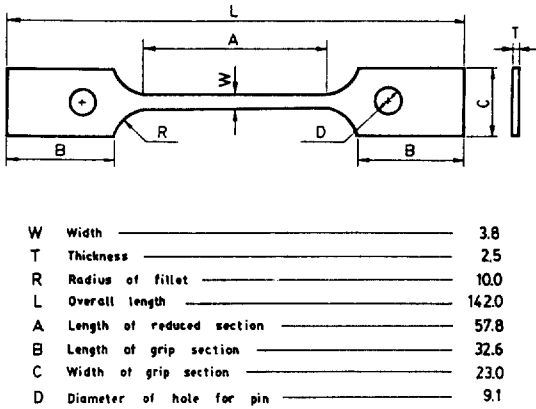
Schematic illustration of the tensile specimen. All dimensions are in millimeters.
